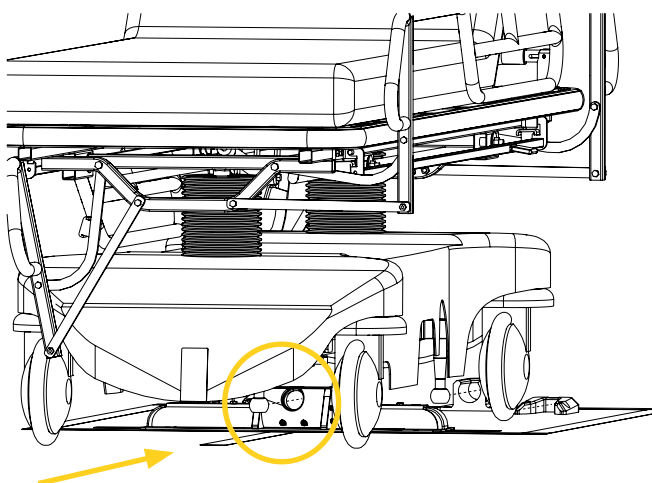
Aligning the AnchorMed Floor Mount and AnchorMed Stretcher Mount
